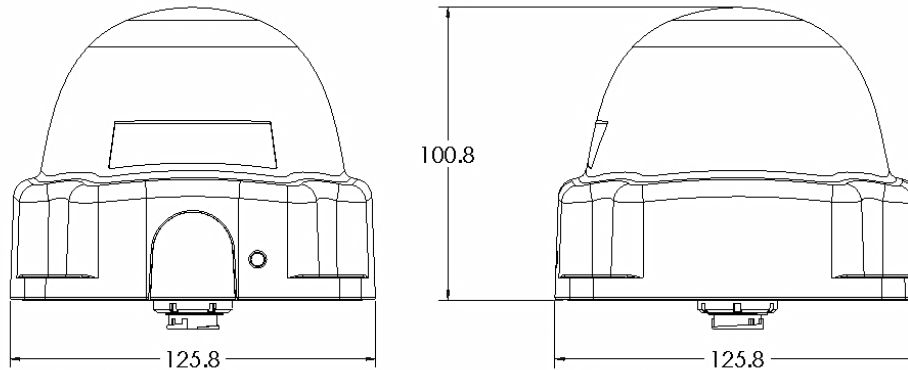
IDP-680 Side View Enclosure Dimensions (mm)
